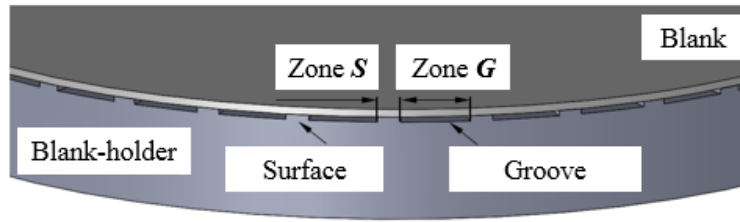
Schematic diagram of test-piece zoning using macro-texture tool
